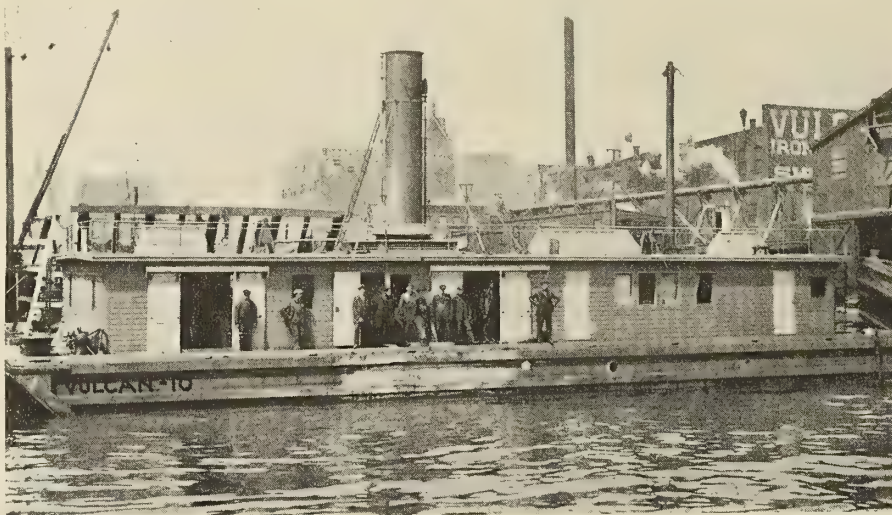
Electric Welder Barge *Vulcan-10
